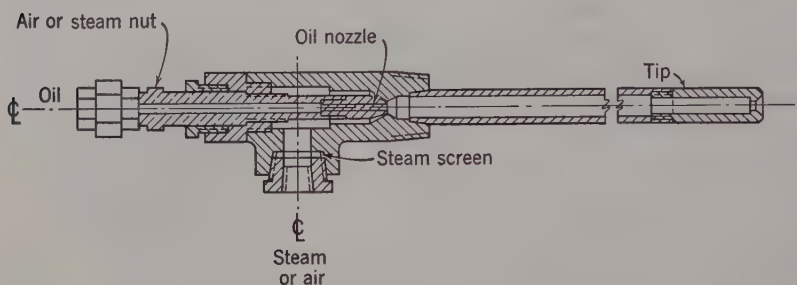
Emulsion-type burner. Courtesy of Bloom Engineering Co.
